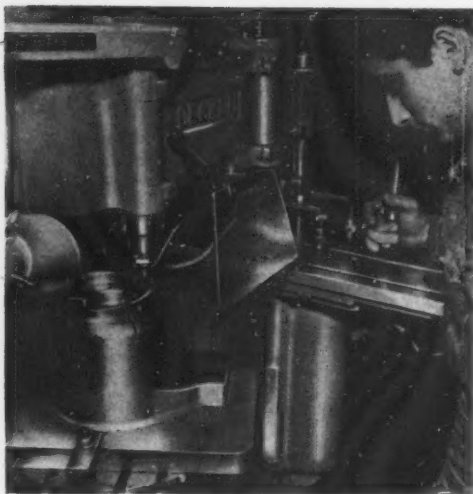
Close-up View of One of the Deckel Die-sinking Machines Three Equally-spaced Slots, which will Form Strengthening Ribs on the Casting, are here being Machined in a Core for an Engine Crankcase Die
